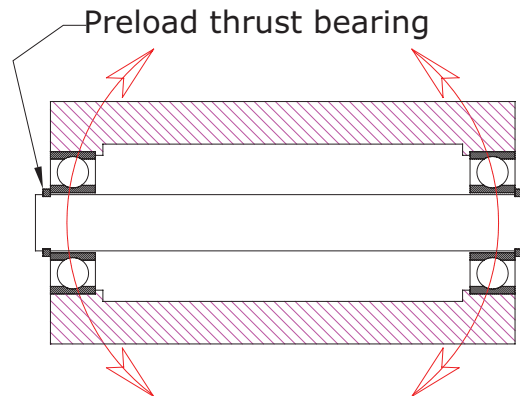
(Colour online) Long bearing support with end thrust bearing preload to eliminate torsional backlash.
